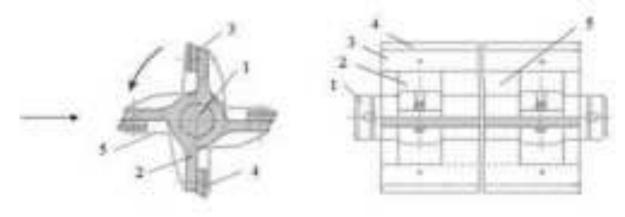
Scheme of the upgraded 5LP linter agitator 1- shaft, 2- cross, 3- metal blade, 4- rubber, 5- sheet
